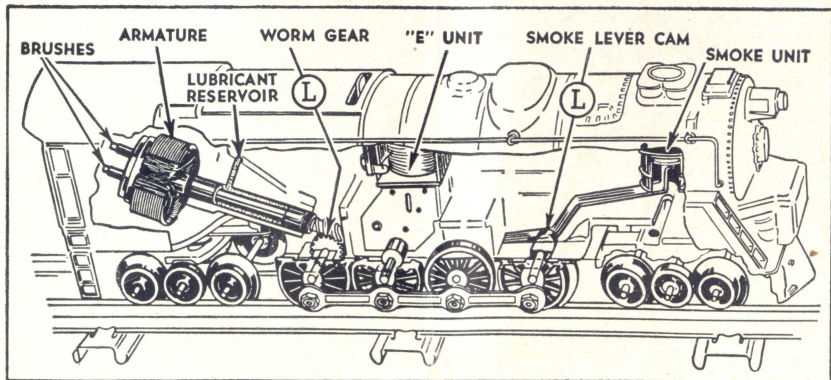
Cutaway View of No. 681 Locomotive Showing Working Parts. Parts Marked "L" Should Be Lubricated Occasionally
